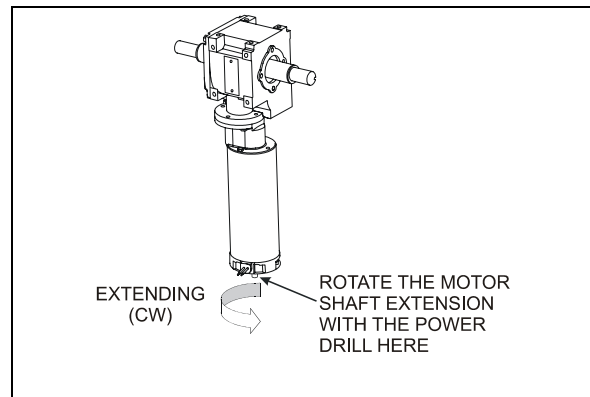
SLIDE-OUT MOTOR ROTATION
